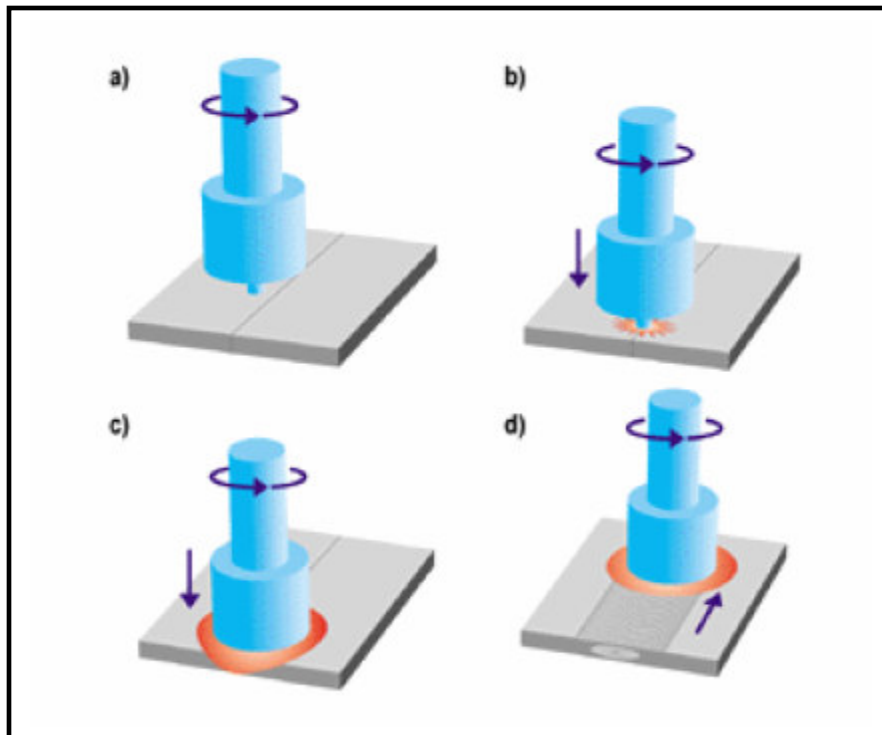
The FSW process, (a) preparing to plunge, (b) plunging pin into the material, (c) force applied on shoulder, and (d) transversing along the weld line [Georgeou, 2004].
